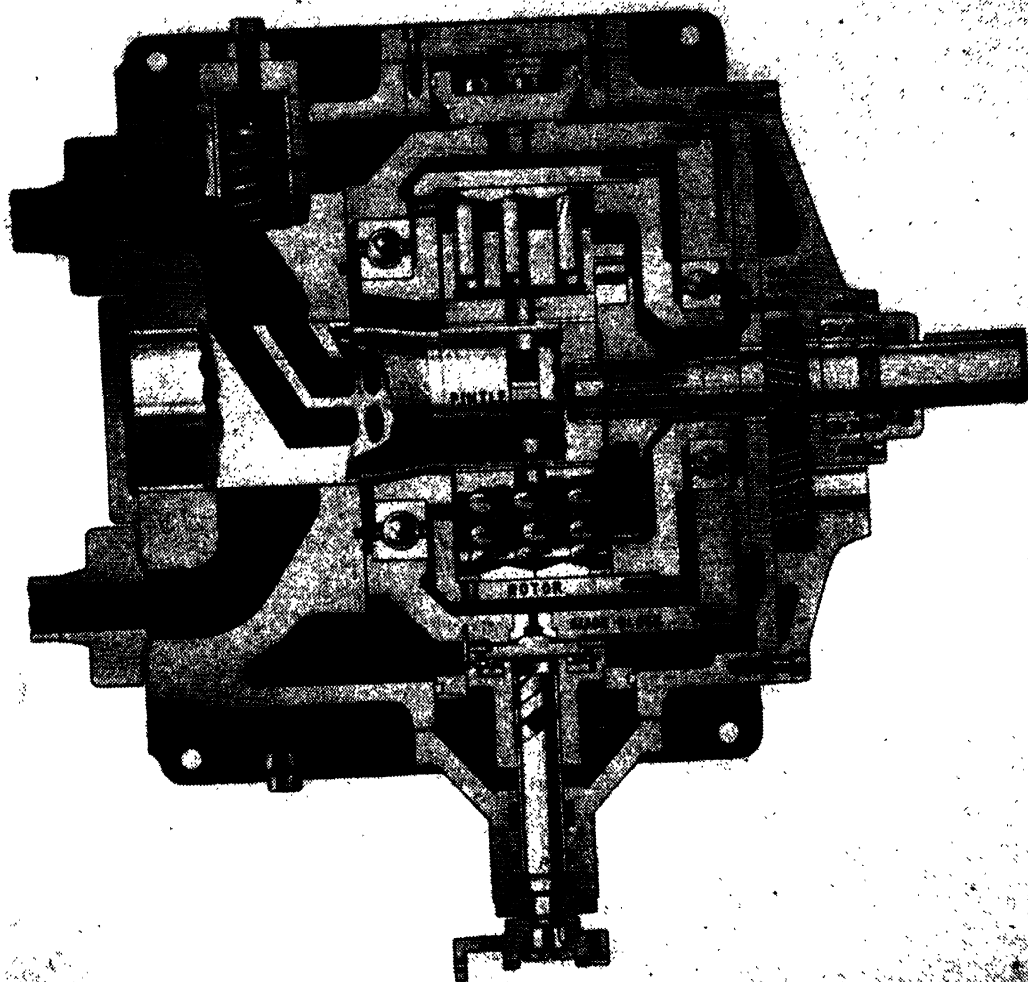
Pump with servo control. (*The Oilgear Co., Milwaukee, Wis.*)
